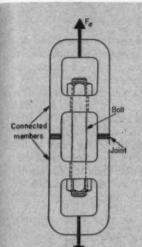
Typical bolted assembly. With metalto-metal joint the connected members usually are stiffer than the bolt; a gasket at the joint makes connected assembly less stiff
